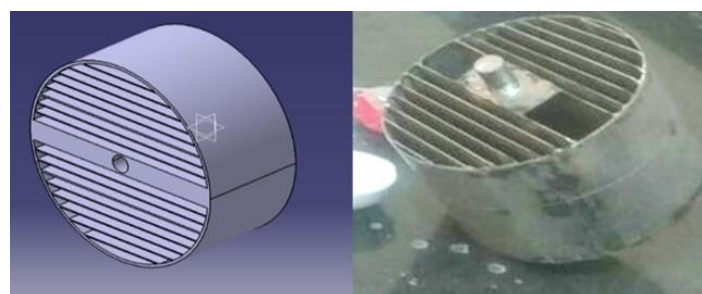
CAD model and photograph of the desiccant wheel with rectangular channels
